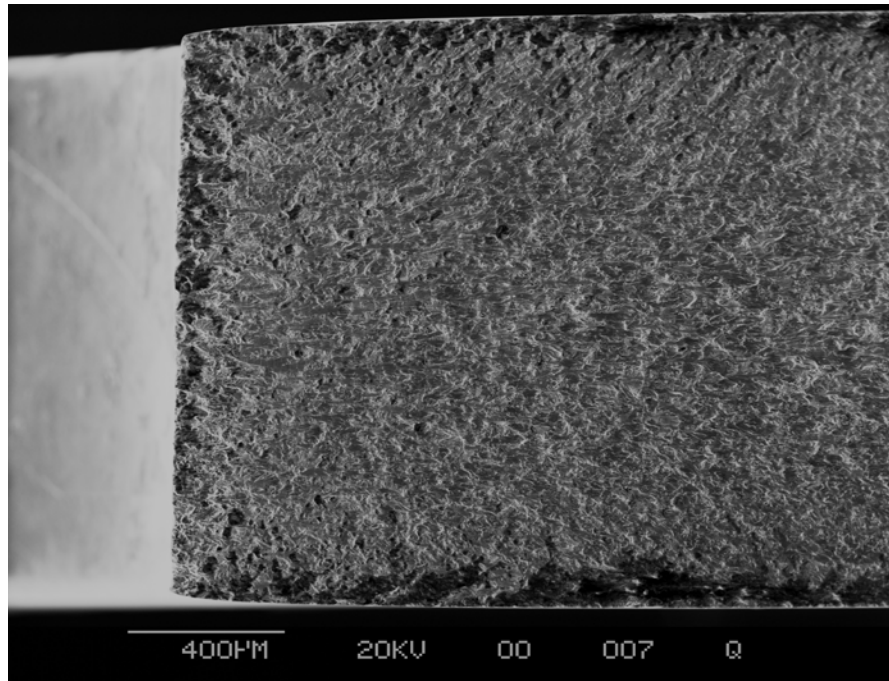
Fracture surface of specimen 9 showing crack initiation area
